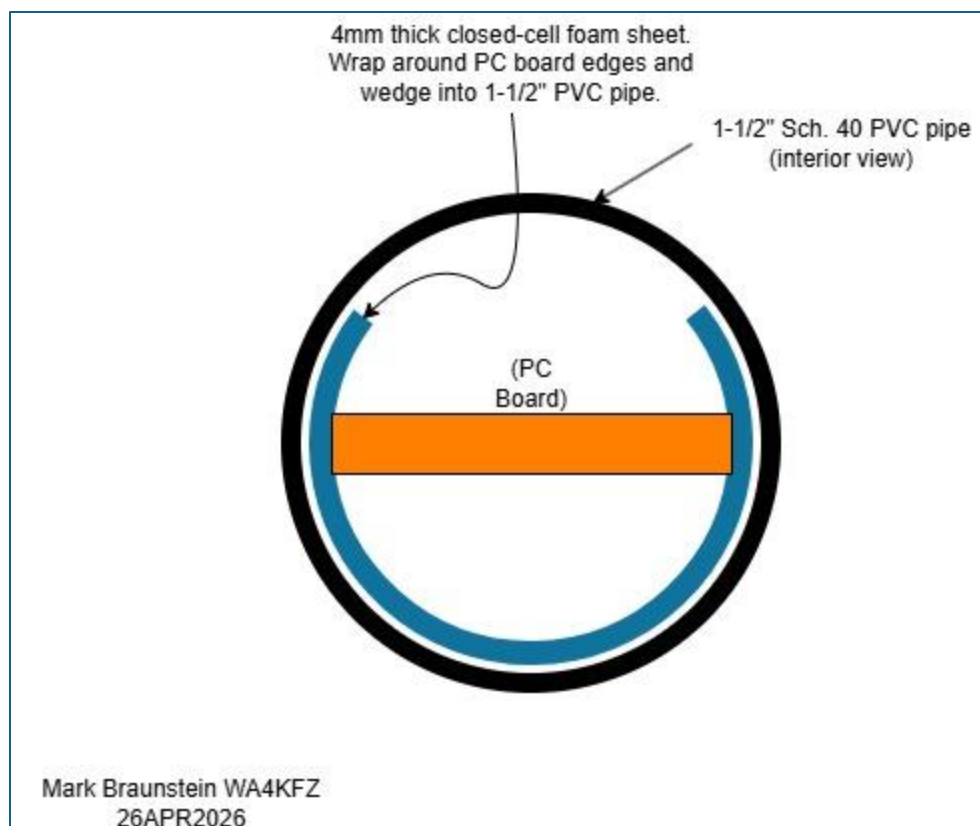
Wrap 4mm-thick closed cell foam material around the PC board and gently push the assembly into the bottom end of the 1-1/2" PVC pipe.
